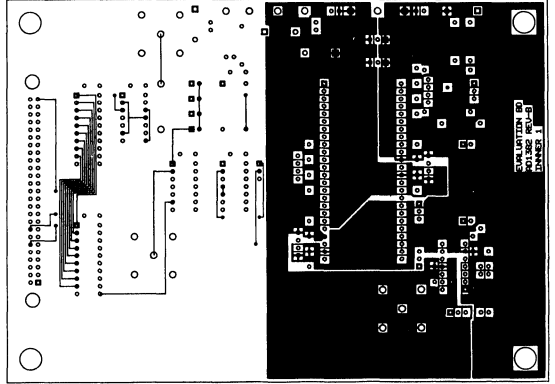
AD1382 Evaluation Board Layout, Layer 2
